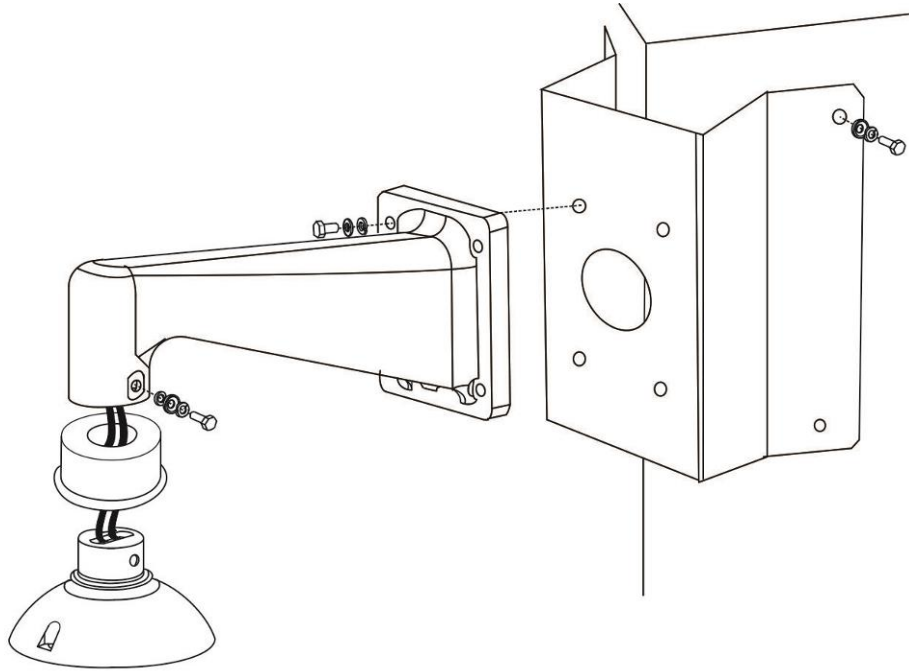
Corner Wall Mounting: Corner Standard/Mini Mounting Plate + Standard Wall Mount + Mount Kit
